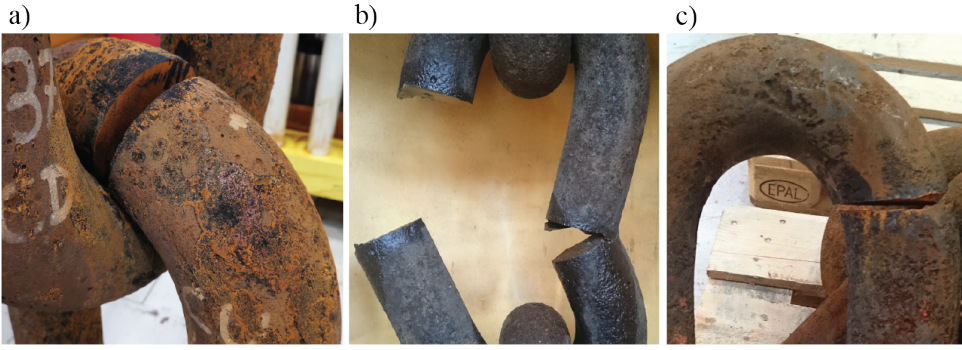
Example of fracture locations after tension-tension fatigue testing: a) crown failure; b) Straight/weld failure; c) K_t point failure.
